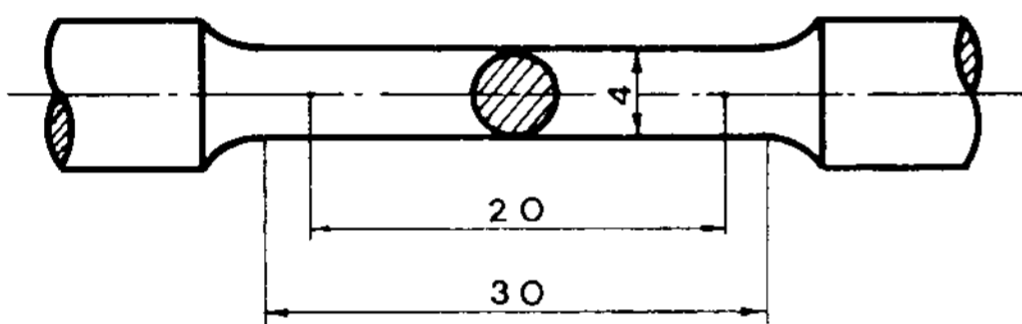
Shape and dimension of specimen for tensile test(mm).
